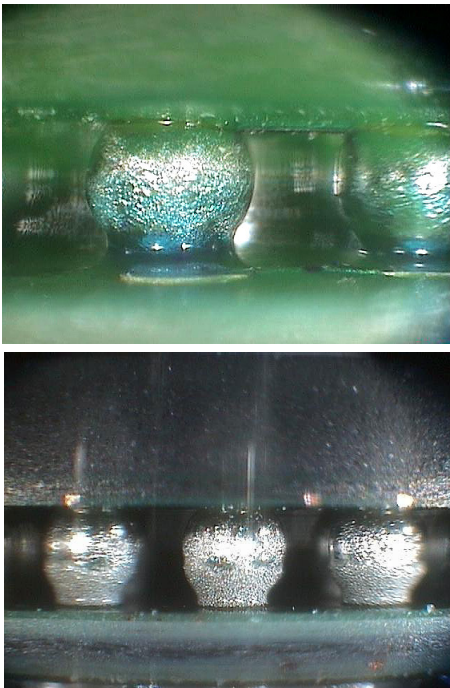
& 2 PoP assembly with dip flux which is blue in colour and a dip paste with a type 5 solder paste
